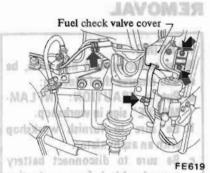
Removing Fuel Check Put drained fuel in an explo-
